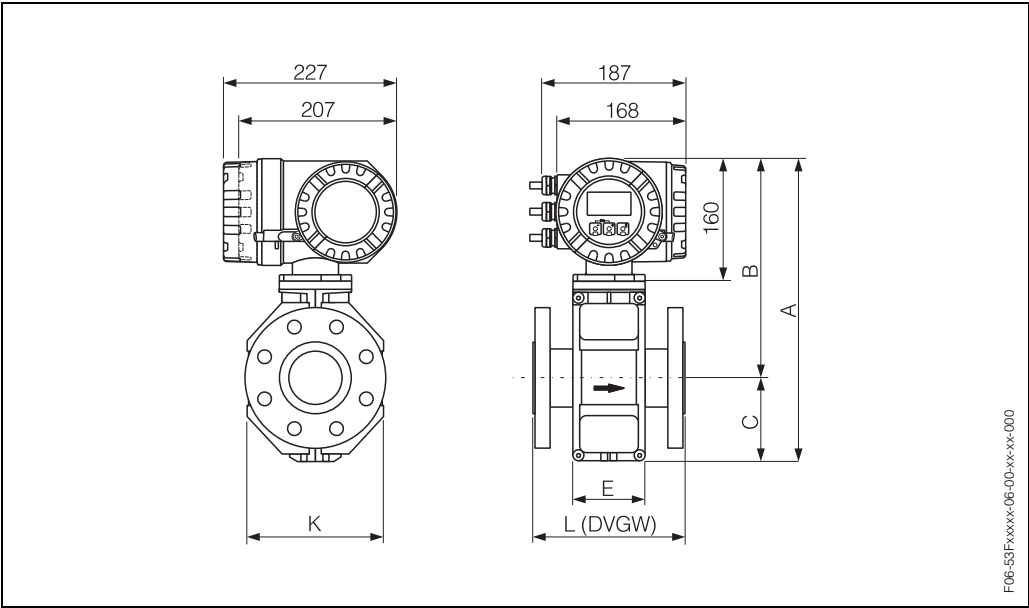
Dimensions Promag W / DN ≤ 300 (compact version)
